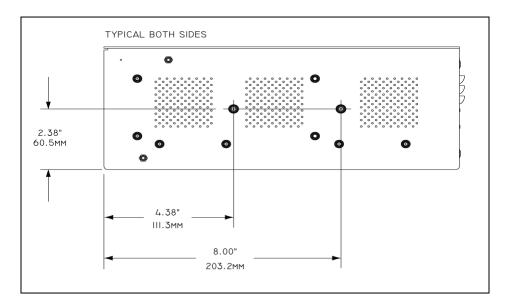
ADH SIROCCO SLIDE RAIL MOUNT HOLE DIMENSIONS.
